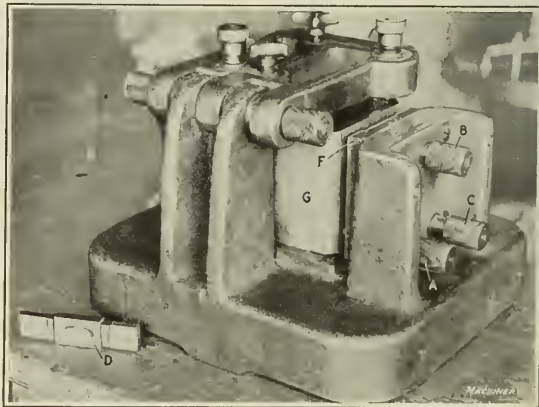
Box Type of Gage for inspecting Tapped Holes and Milled Surfaces on Electric Starter Generator Frame
